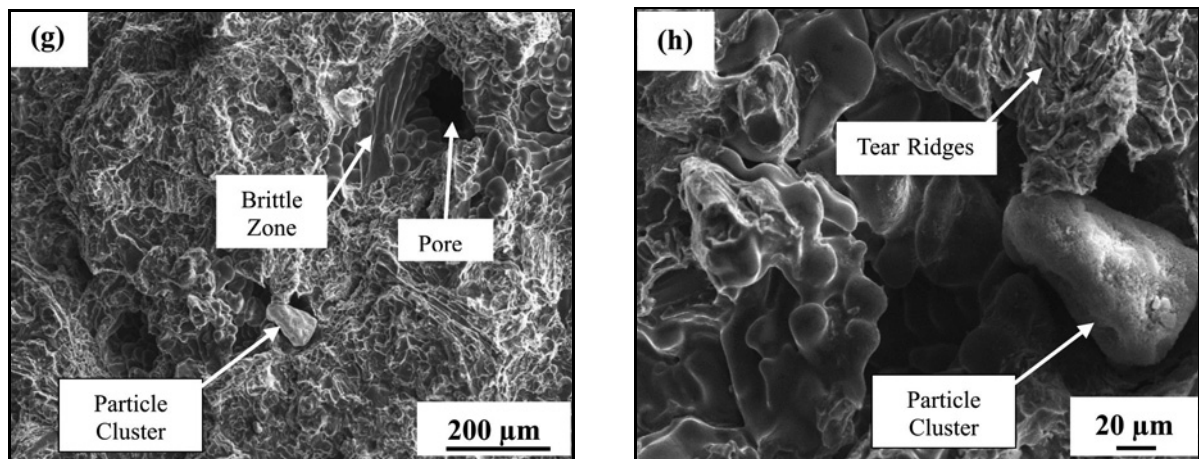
Fracture surface morphology of composite samples: (g) and (h) A6.
